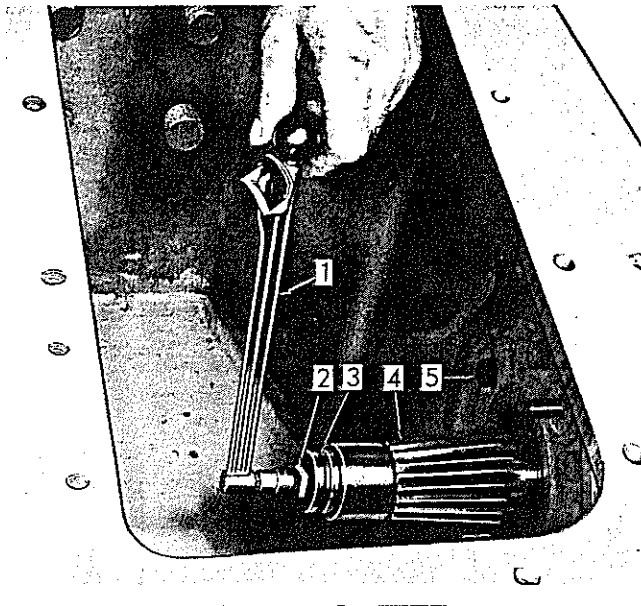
Checking Pre-Load of Bevel Gear Shaft Bearings (T-25732)
